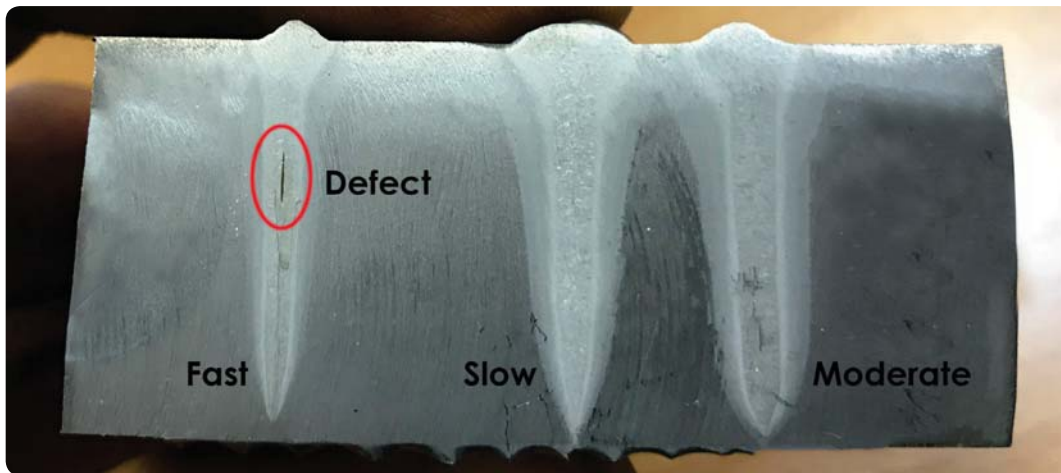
Macrostructure of the electron beam welds performed on a flat plate using different welding speeds
